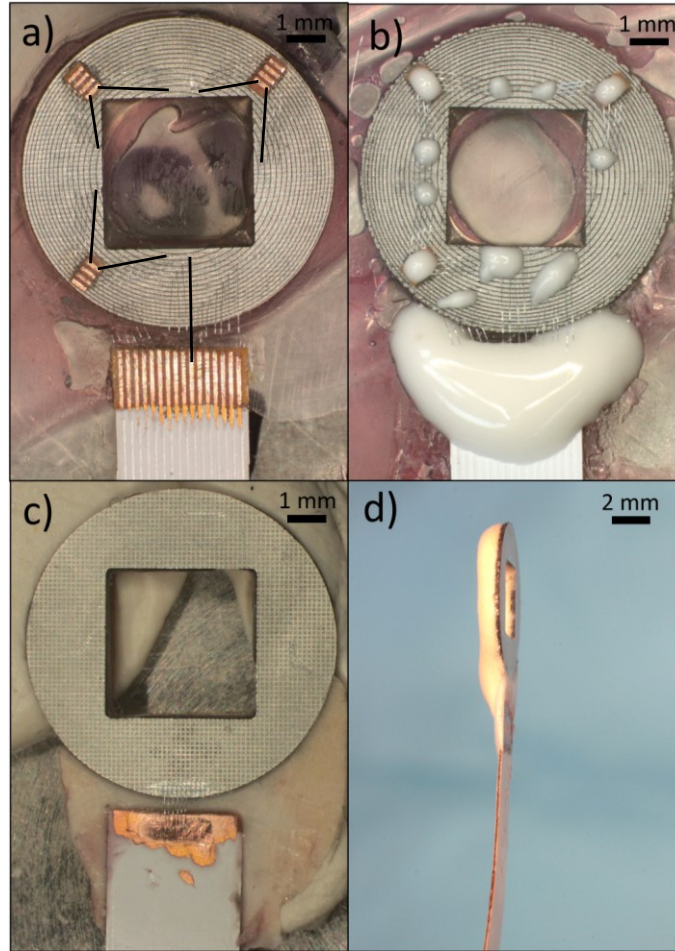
Fabrication of an annular array with a side-looking form factor. (a) Piezoelectric composite after laser dicing outline, etching array elements, and wirebonding elements to traces on the PCB. Small sections of the PCB were used to connect the inner four elements around the hole. (b) Wirebond contact points potted in alumina-loaded epoxy. (c) Front of the array after wirebonding to the ground plane on the PCB. (d) Side view of the finished array.
